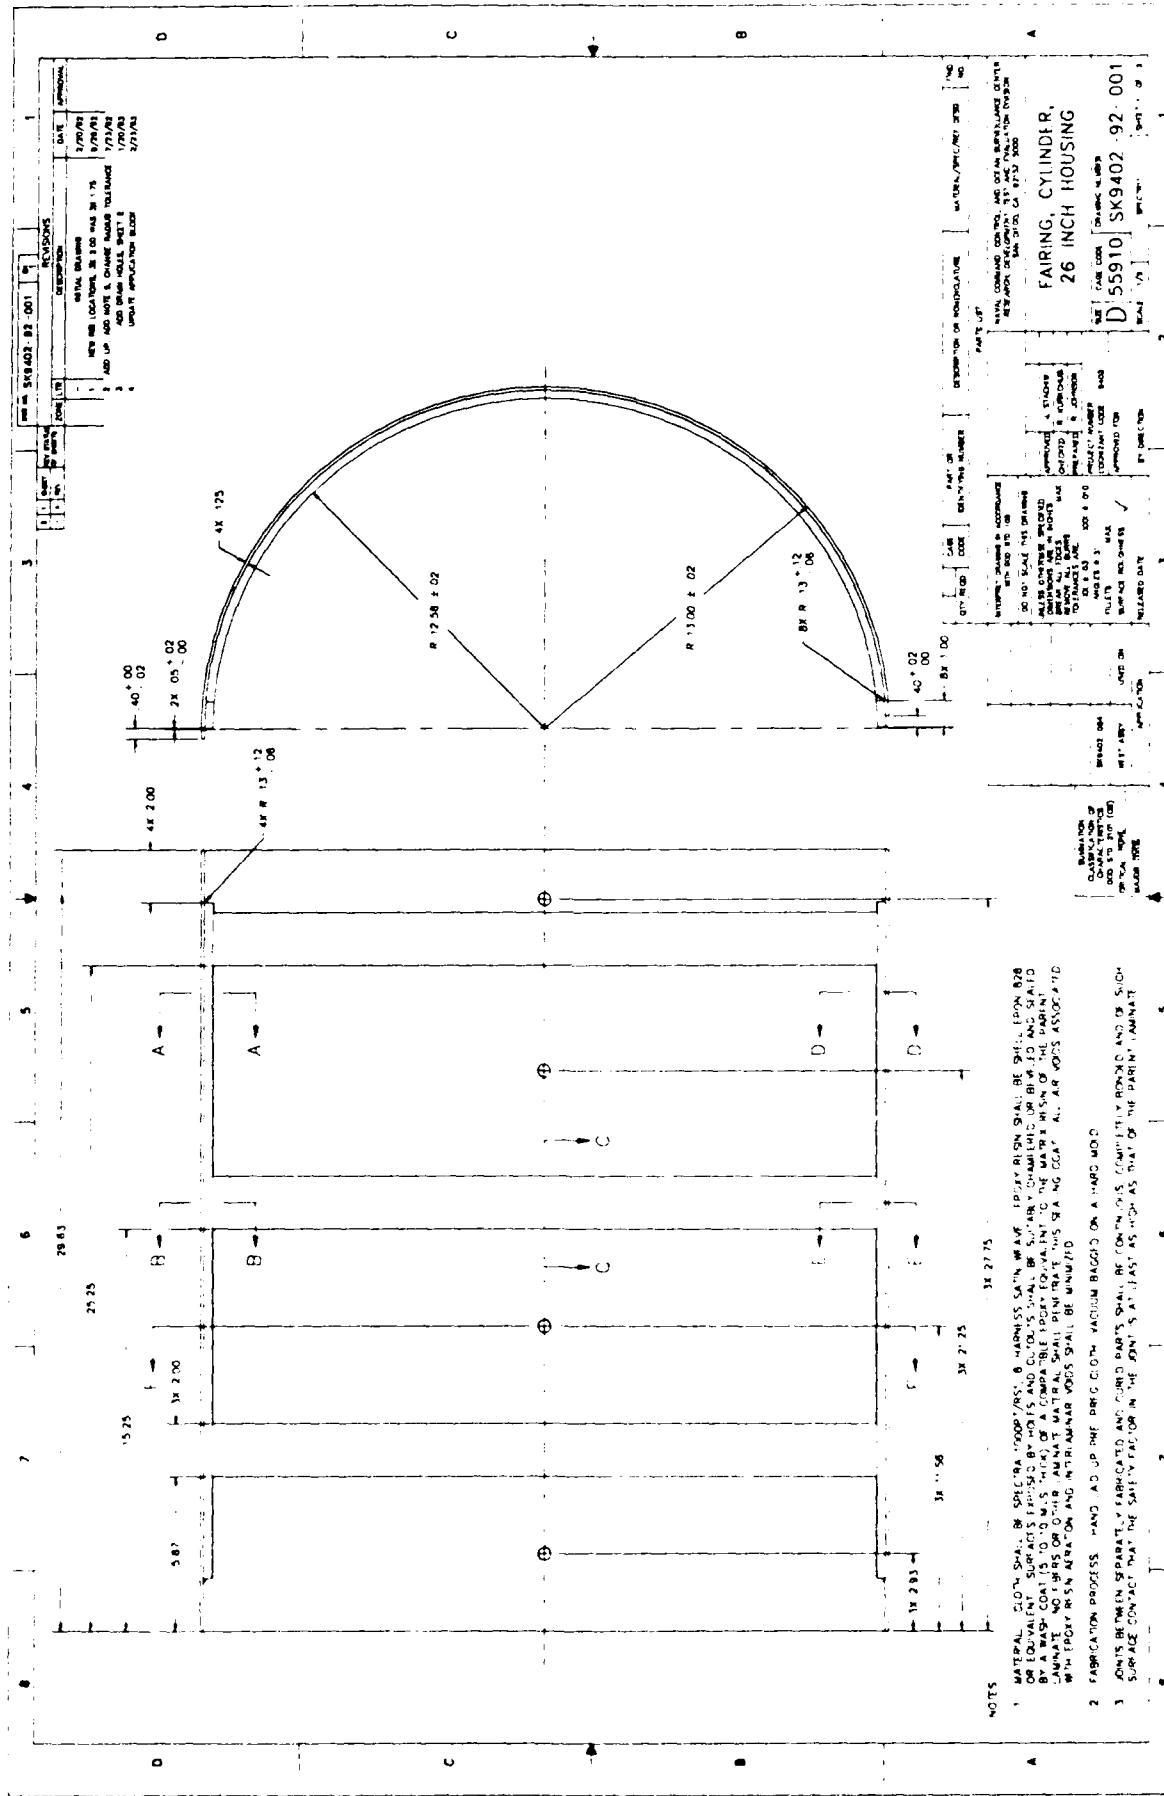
26-inch housing cylinder fairing, Sheet 1.
